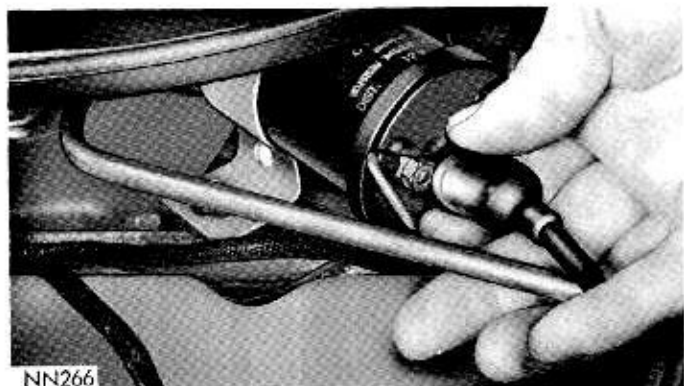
Installing Secondary Cable and Nipple at Coil Tower
